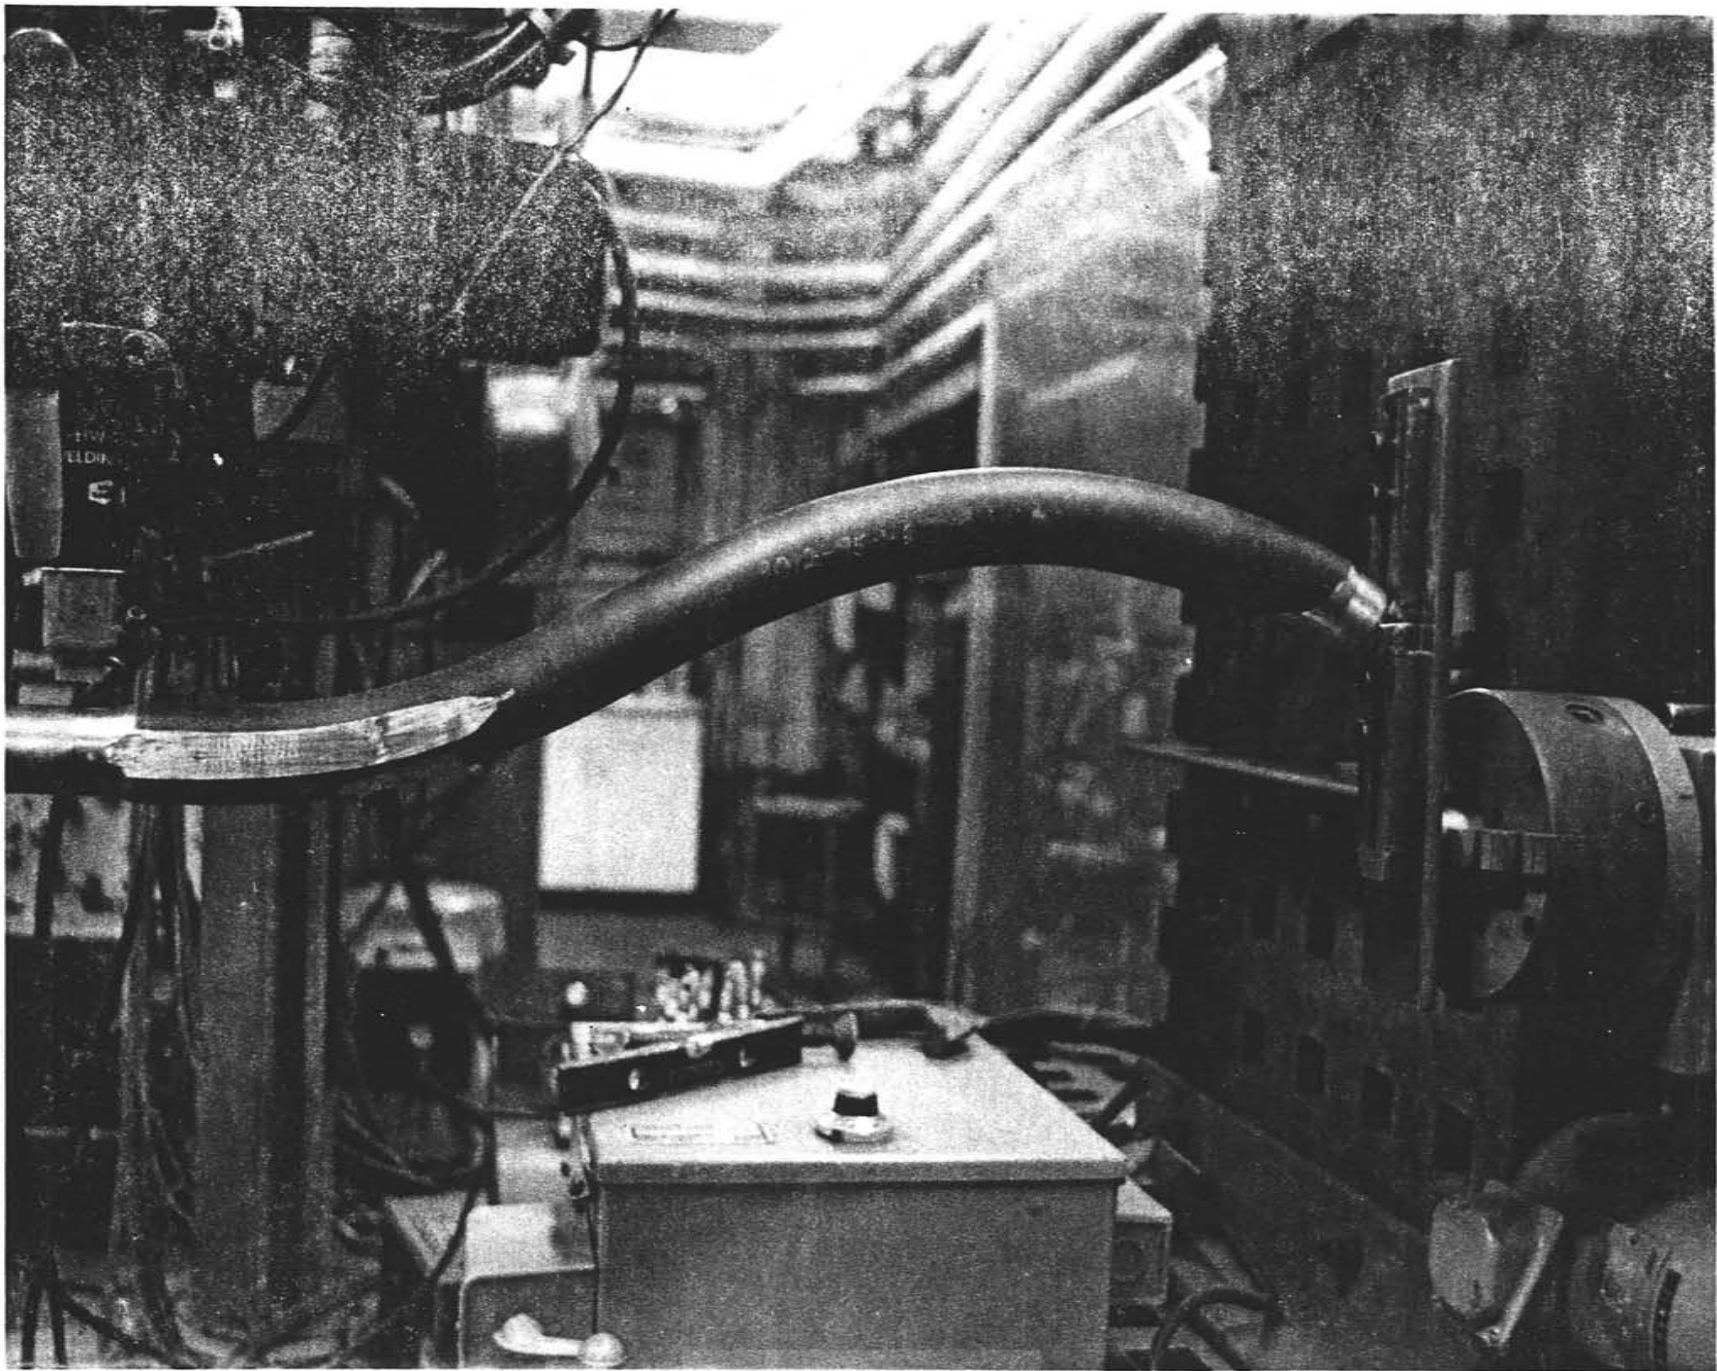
SAFE END-TO-TUBE WELD BY TIG PROCESS
